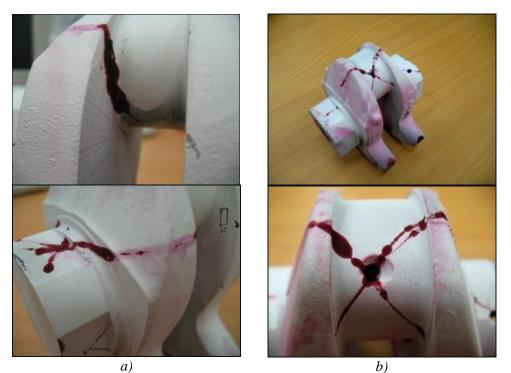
Failure mode of the torsional test: *a*) Crack around the counterweight; *b*) Crack around the bearing oil hole.
